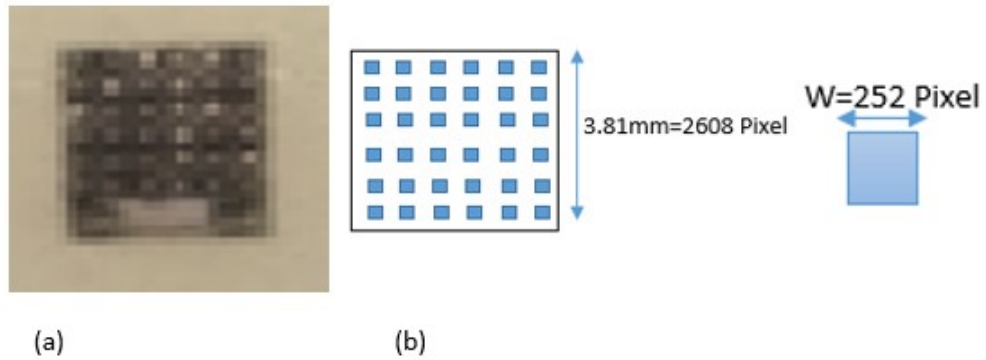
(a) Top view for real picture of module tested under microscope, (b) dimension explanation.
